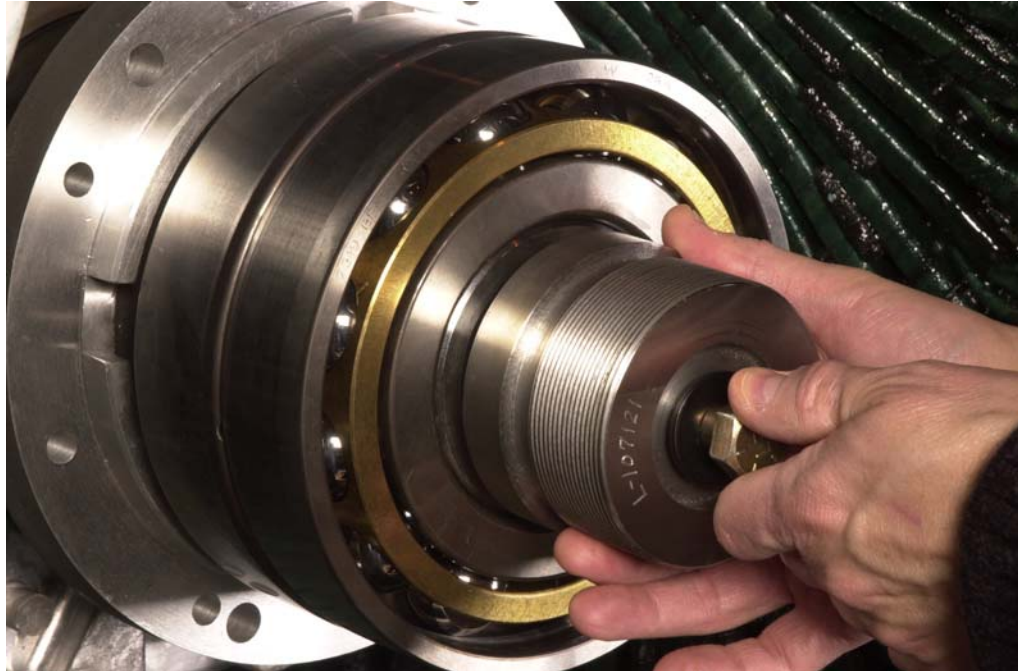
Use an impact wrench to tighten the cap screw on the shaft extension. Torque to 150-200 ft-lbs
